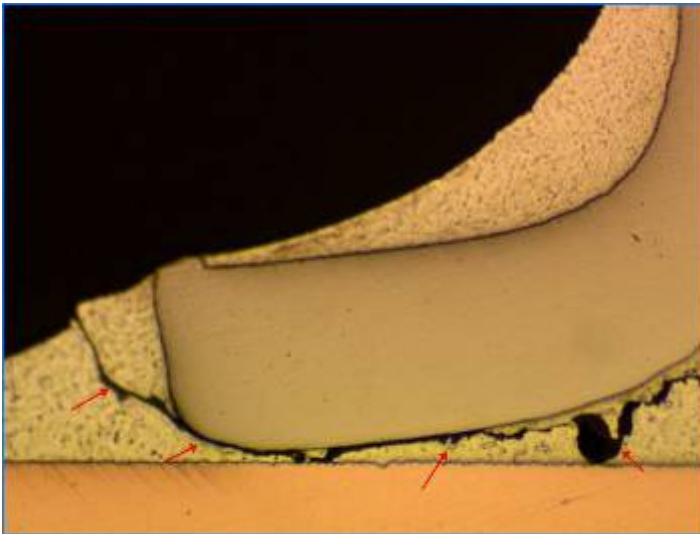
cross section, SN67, U61, left lead solder crack, 200xa
